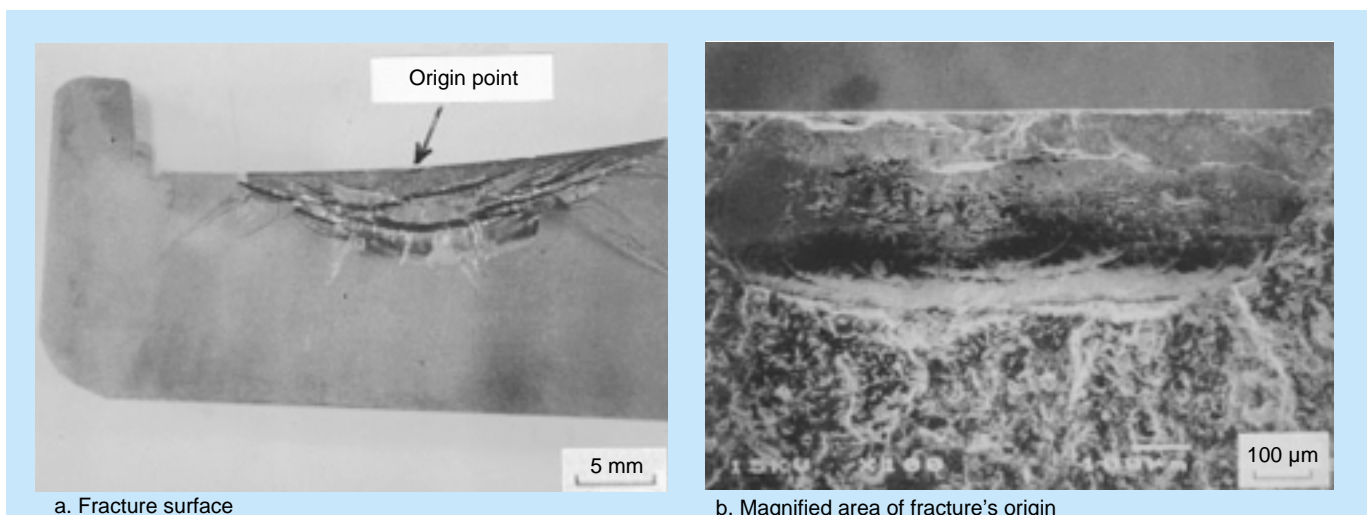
Example of inner ring fracture of a spherical roller bearing
